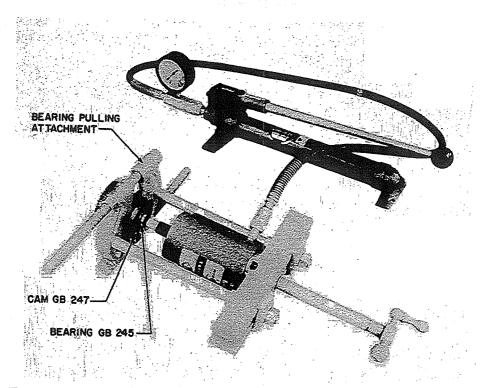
Detector, Removal of Cam GB247 and Bearing GB245
